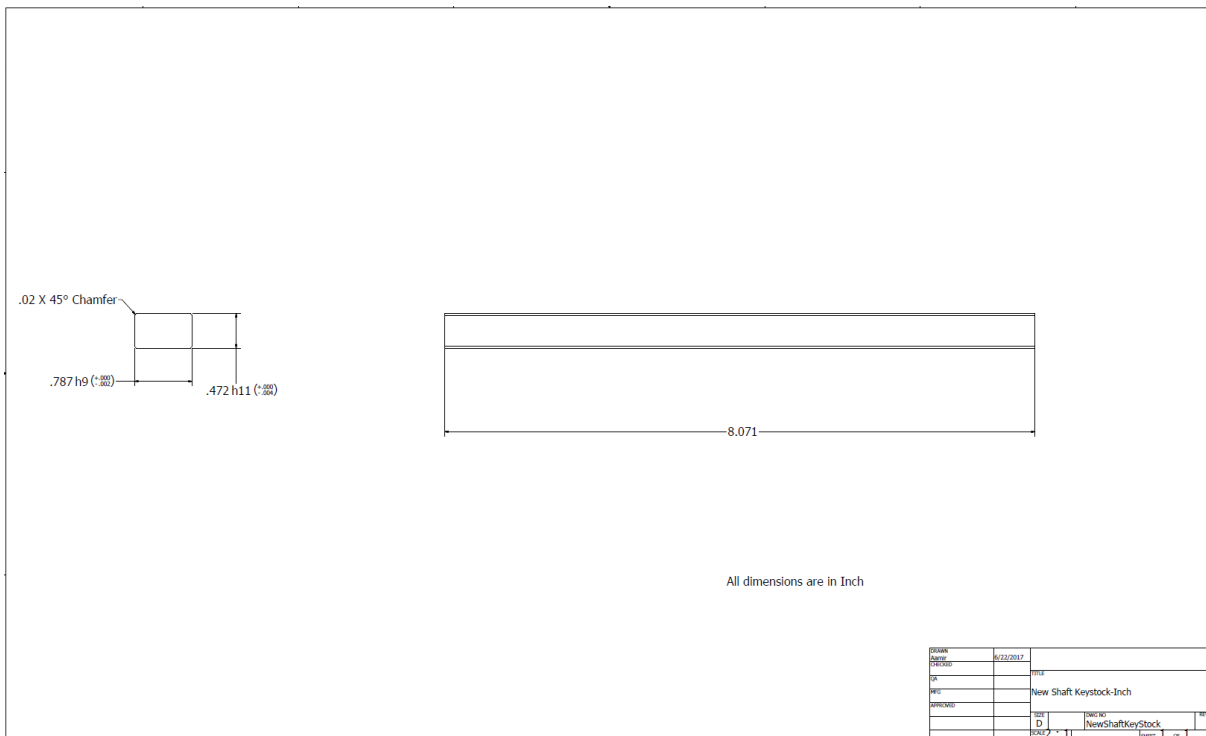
Key to couple clutch adapter, new shaft and sleeve for C.V. joint.
